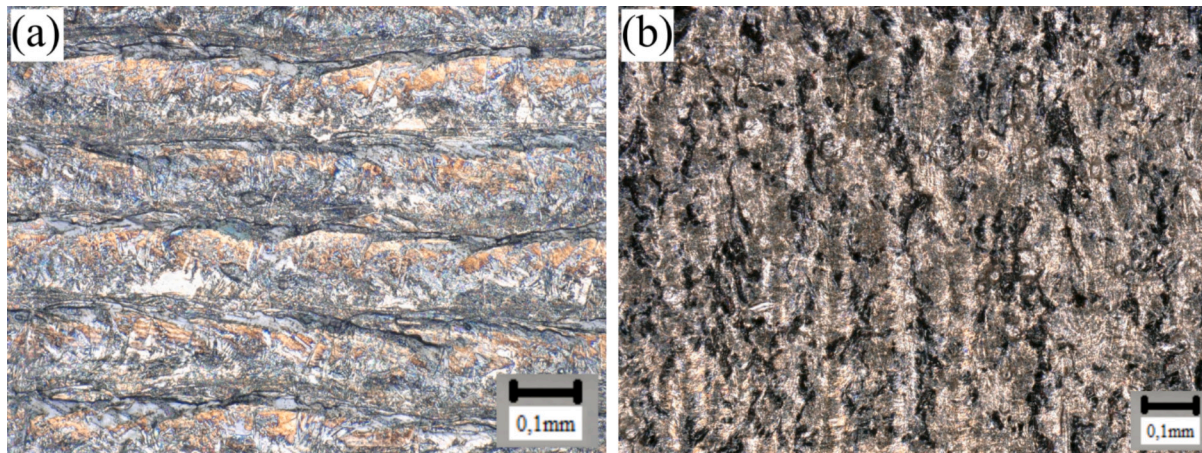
Surface quality in as-printed state: (a) front view on SLM piece and (b) side view.
